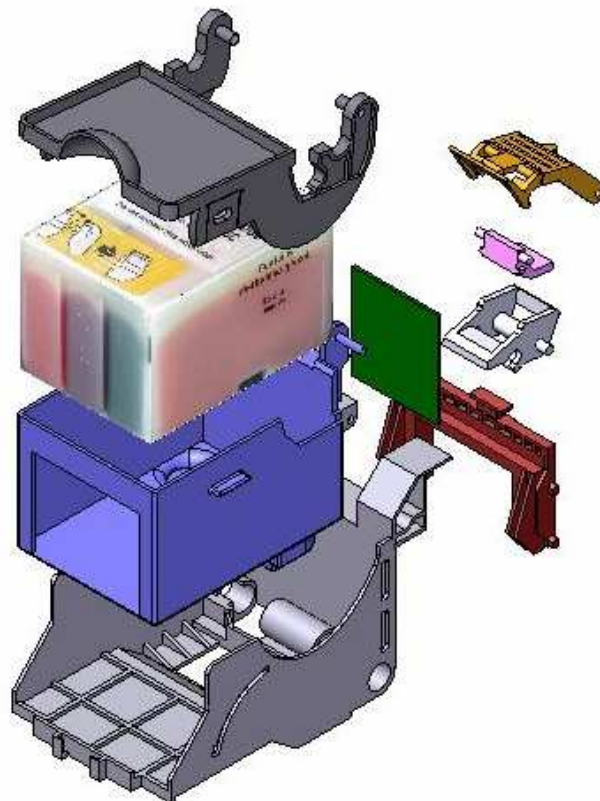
(b) Drawing of an ink cartridge holder in exploded view
